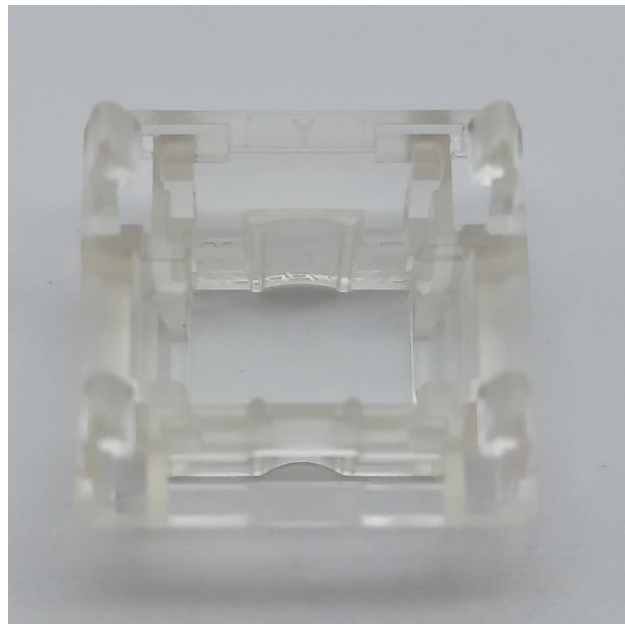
Winkeyless.KR Zeal Clear top housing internal side showing centered, top edge single letter mold marking location.
